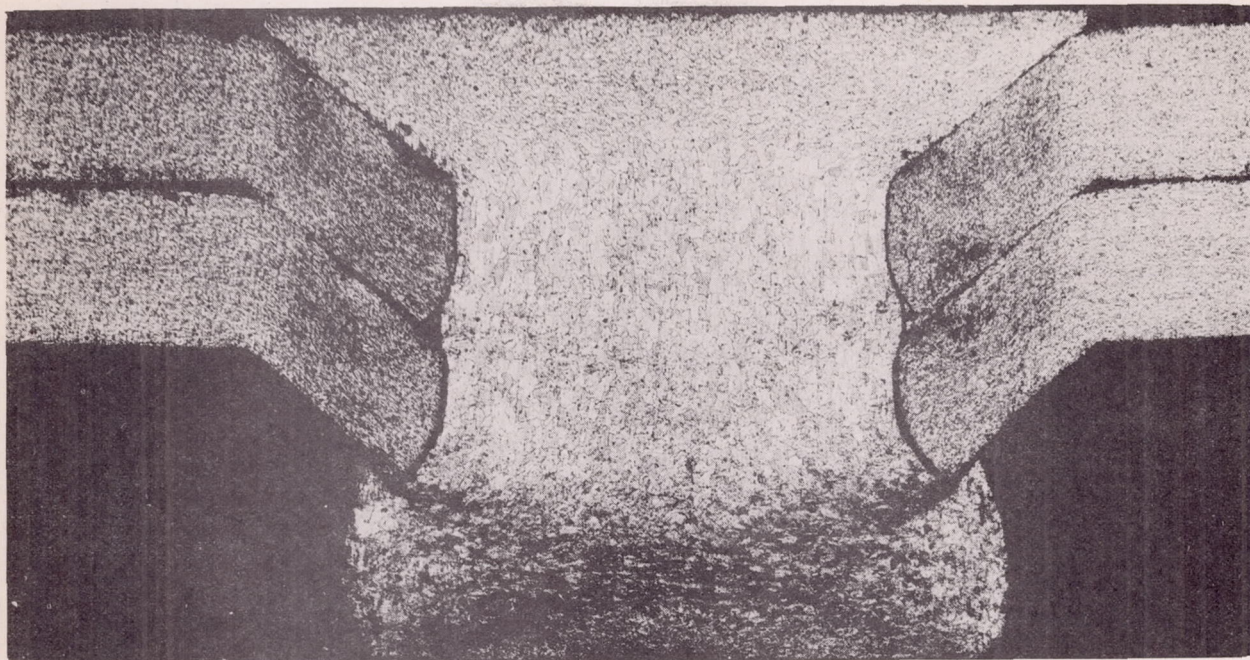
Set of dimples produced in 0.040-inch 24S-T sheet when maximum punch diameter and maximum die diameter were both 0.231 inch. Dimples produced with 5000-pound pressure in sheet drilled with an 0.1100-inch diameter No. 35 drill. Magnified 20 times.
